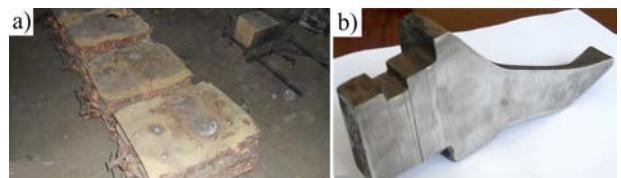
Casting of the cutting portion: a) molds, b) cross-section of the cutting portion
